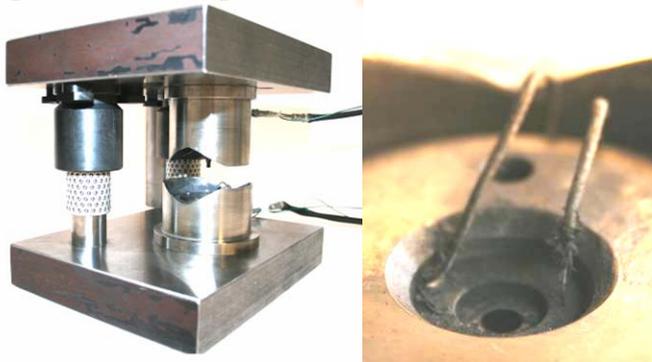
Experimental setup. Left: Guided tool-set. Right: Die and punch with thermo couples and heaters
